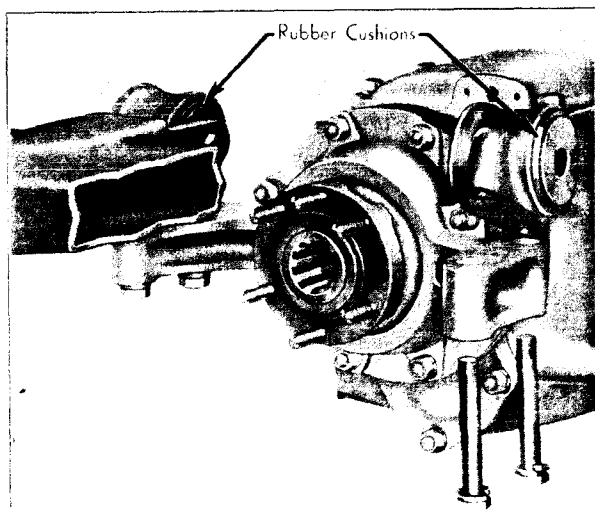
Adjustment of the transmission supports is identical to that of the "A" models
